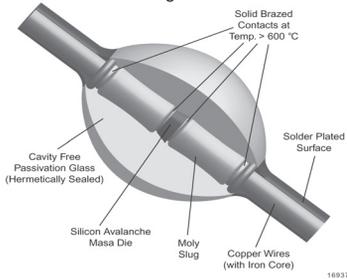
Cross Section of Sinterglass Diodes Construction
